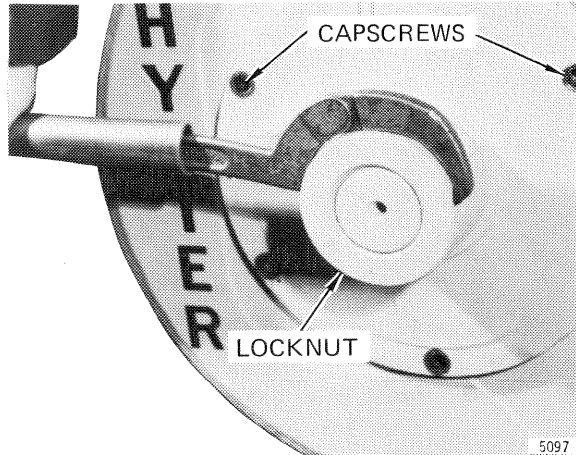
DRUM AND DRUM SHAFT, LOCATION OF COMPONENTS
